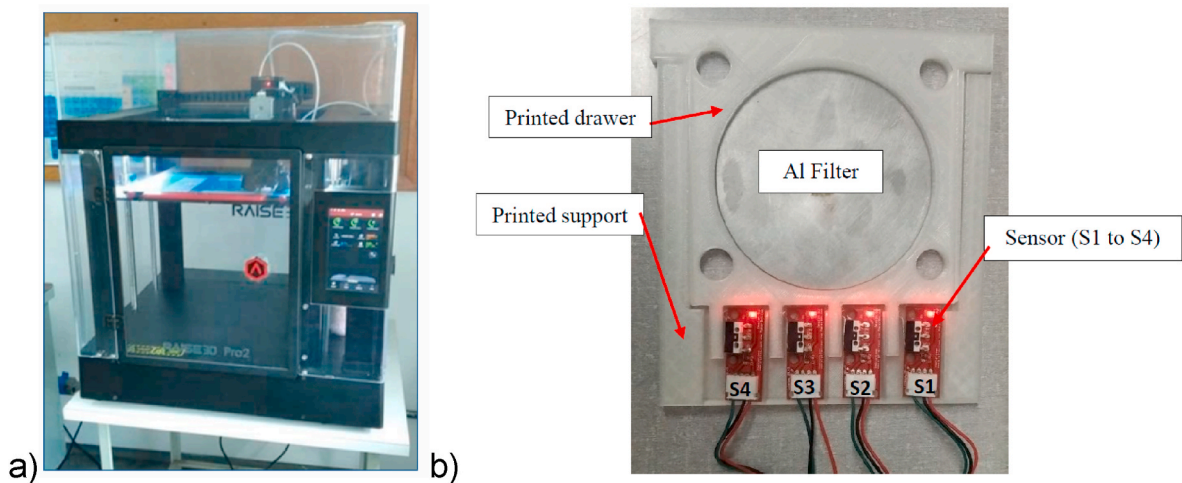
a) FFF 3D Printer (Raise3D PRO); b) the prototype of support and holder, with the sensors connected.
